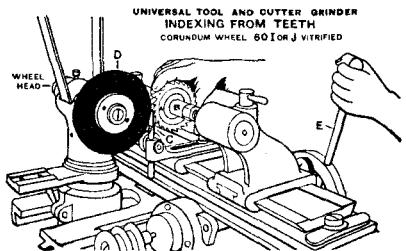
GRINDING PLAIN MILLING CUTTER.
